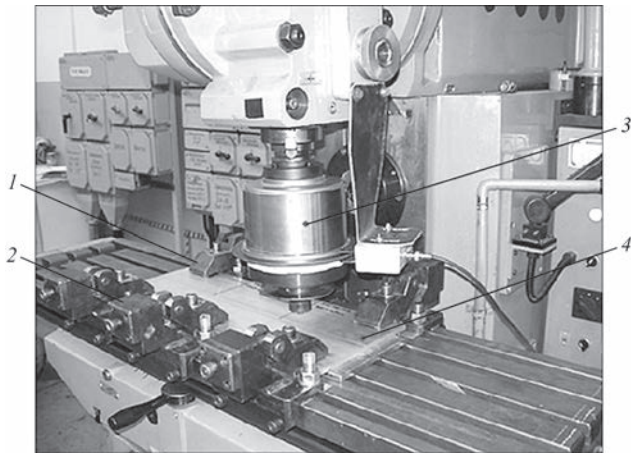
Type of installation for friction stir welding: 1 — tool; 2 — fastener; 3 — unit for tool fixation; 4 — parts to be welded
